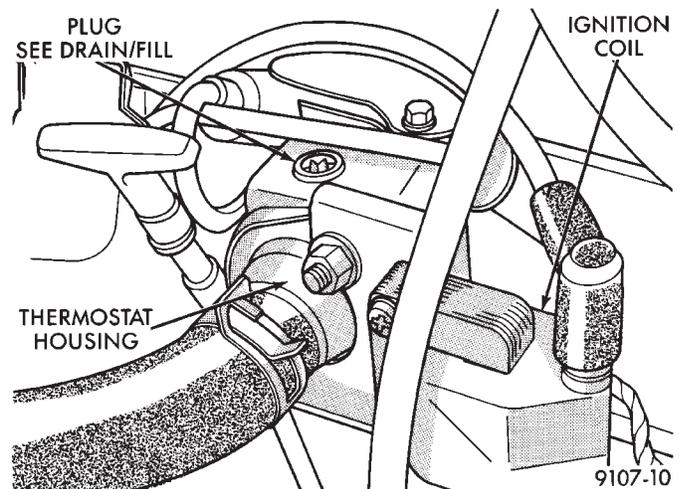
Thermostat Housing Drain/Fill Plug—2.2/2.5L Engines
